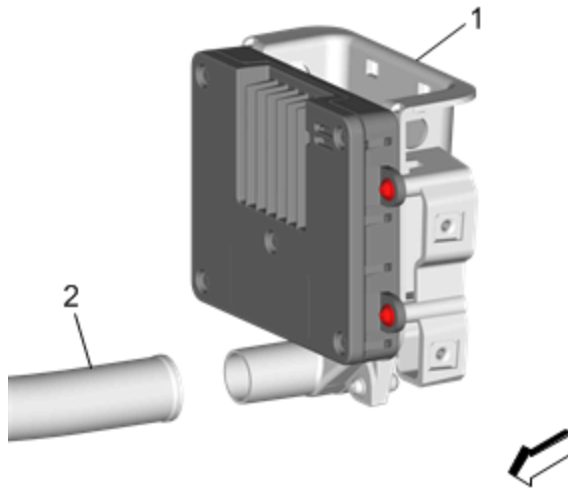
Front Floor Console Housing Assembly And Radio Cooling Duct
